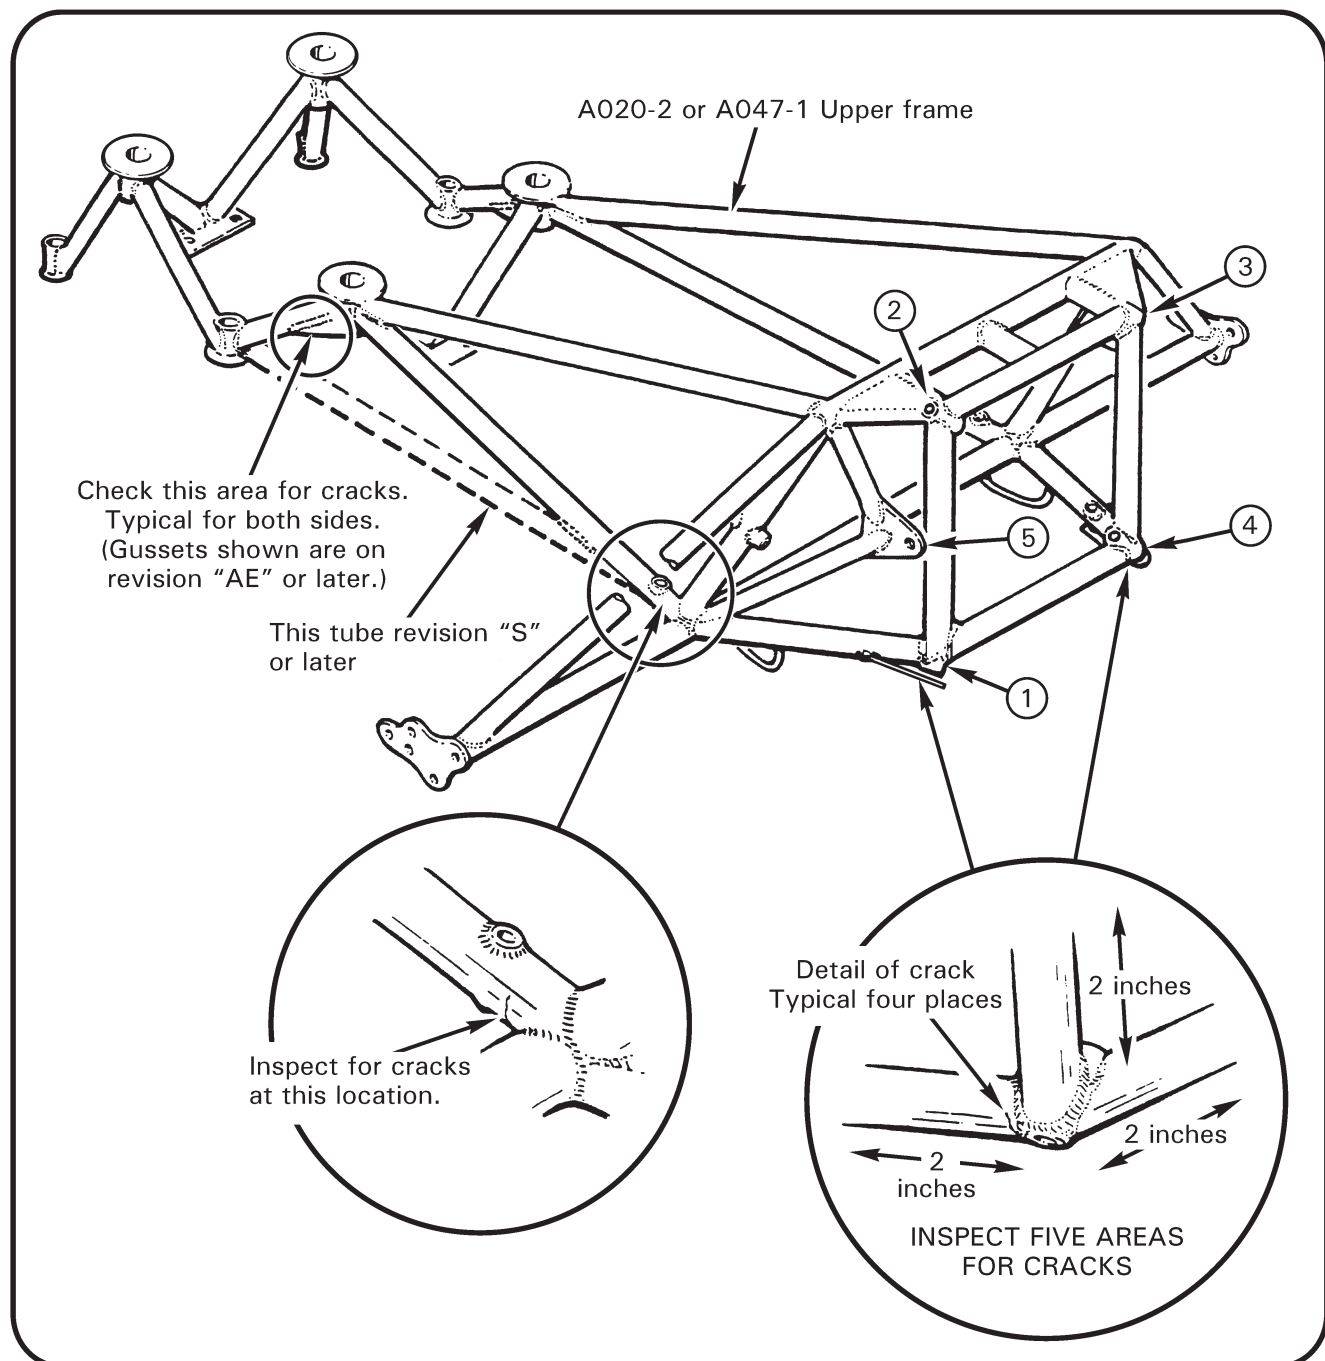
UPPER FRAME CRACK INSPECTION
